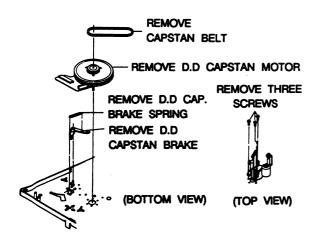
Capstan Motor and Capstan Motor Brake Removal
